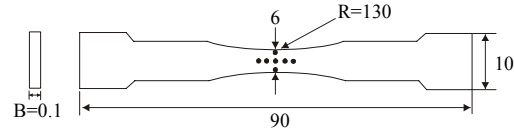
Specimen geometry used for Video-Traction[®] tensile tests (dimensions in mm).
